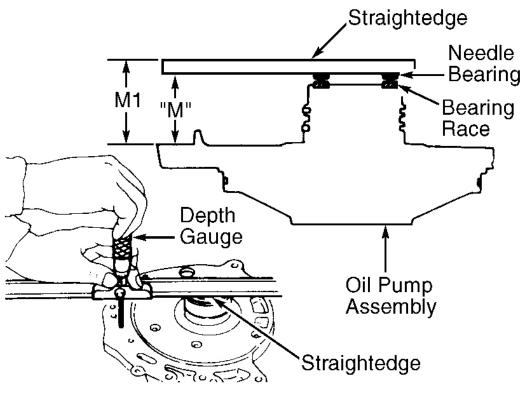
Measuring Output Shaft Bearing Preload Courtesy of NISSAN MOTOR CO., U. S. A.
